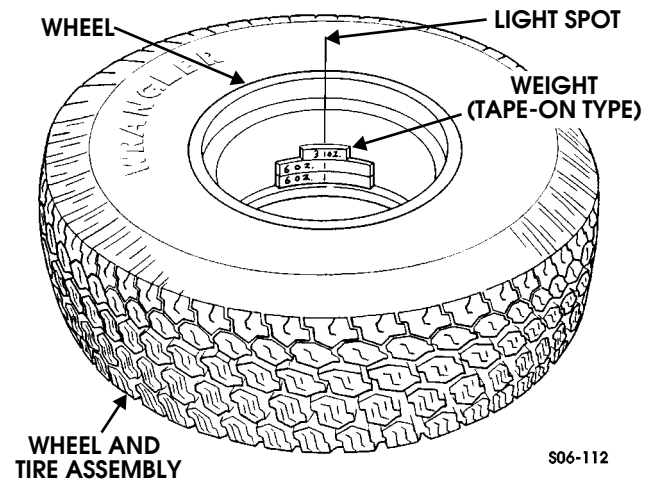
Marking Wheel and Tire Assembly Light Spot
